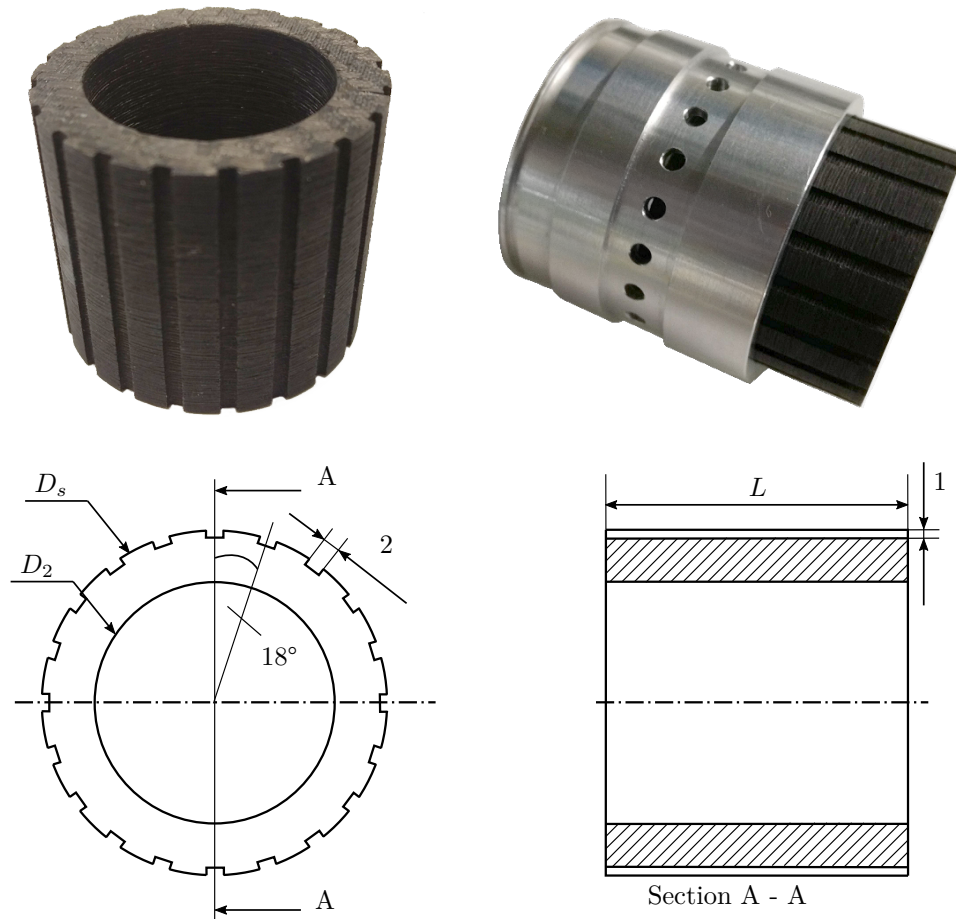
Top: C/C and aluminum liner, bottom: dimensions of the C/C liner [102]
